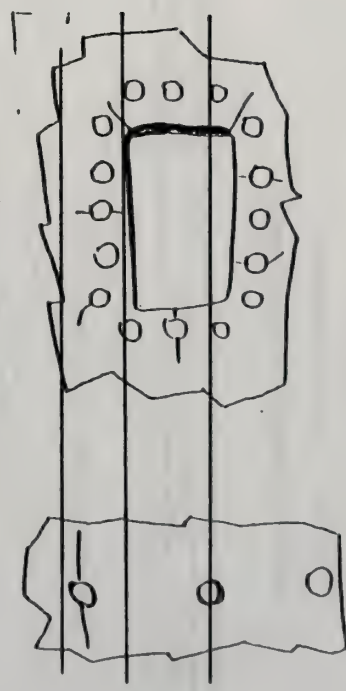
RIVETS AND STAYBOLTS-HOT CRACKS
